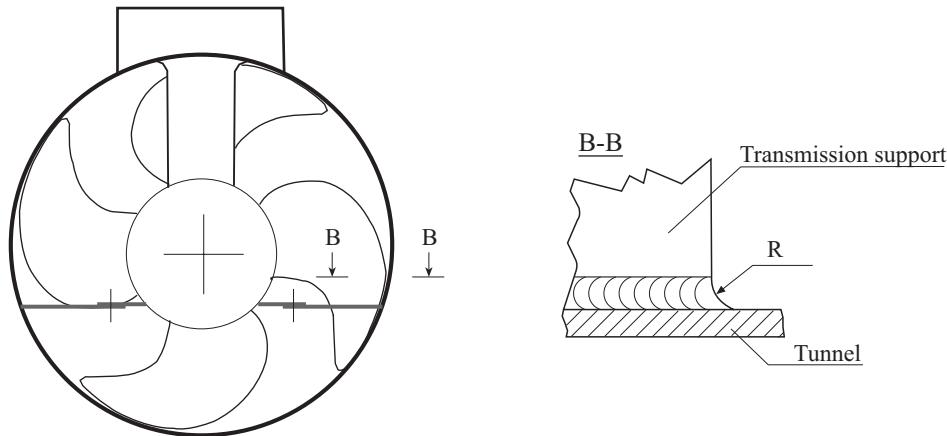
Connection between gear housing support bracket and thruster tunnel
